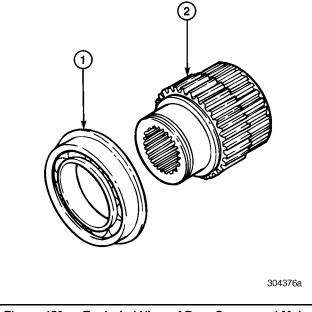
Exploded View of Rear Mainshaft Bearing Cover
